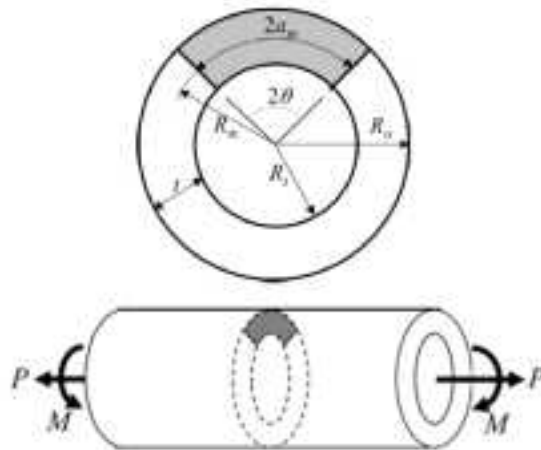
Geometry of circumferential through-wall cracked pipe under axial tension (P) and global bending (M)
